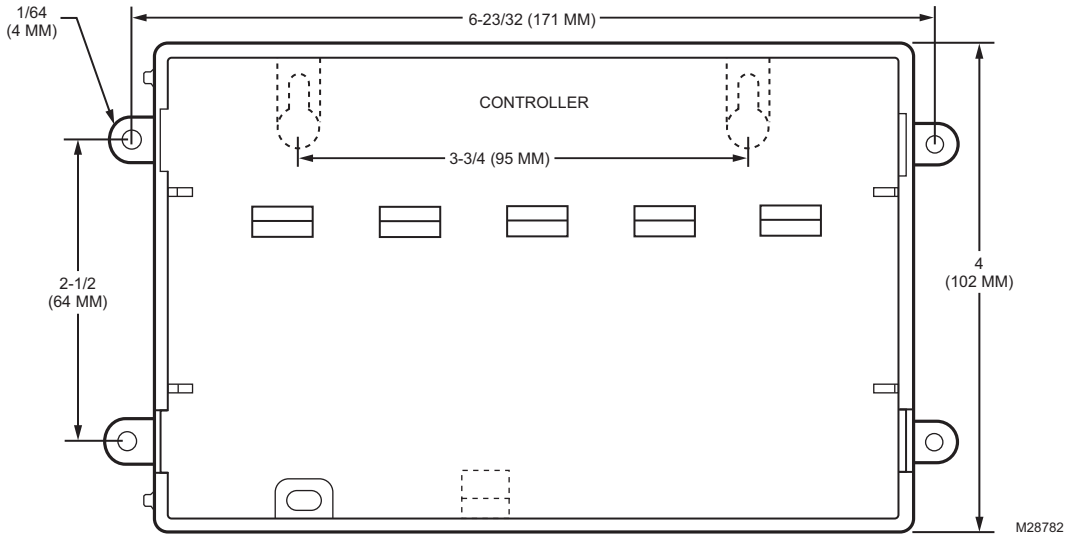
Controller mounting tab dimensions in inches and (mm).
